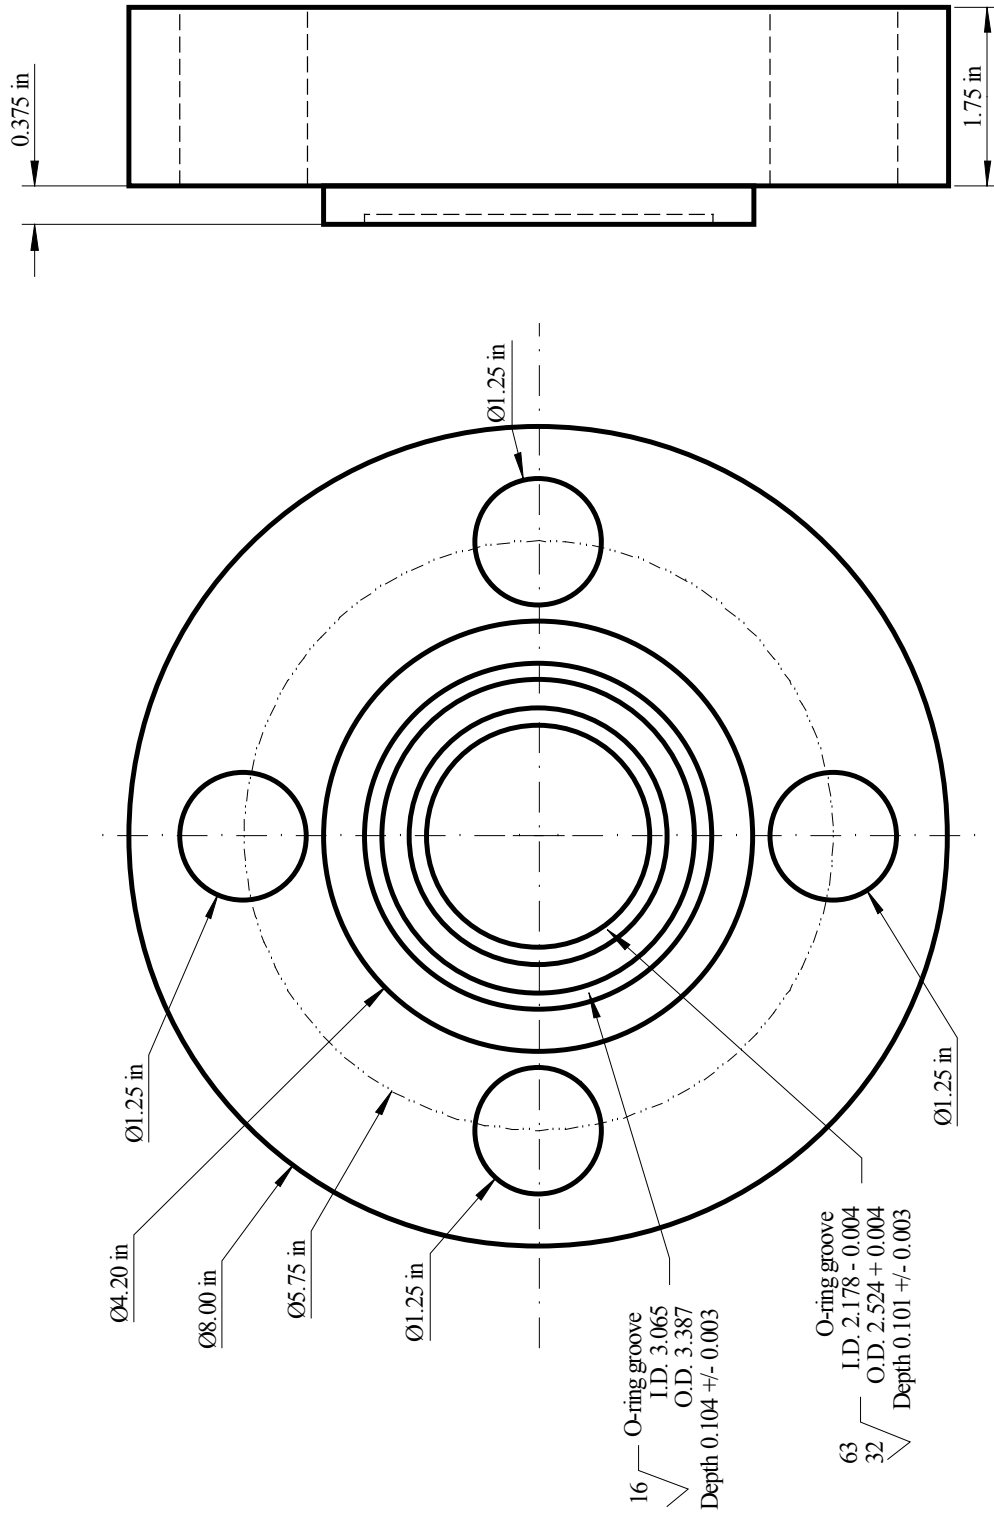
Design drawing of removable flange for single metallic seal (vessel cap).
